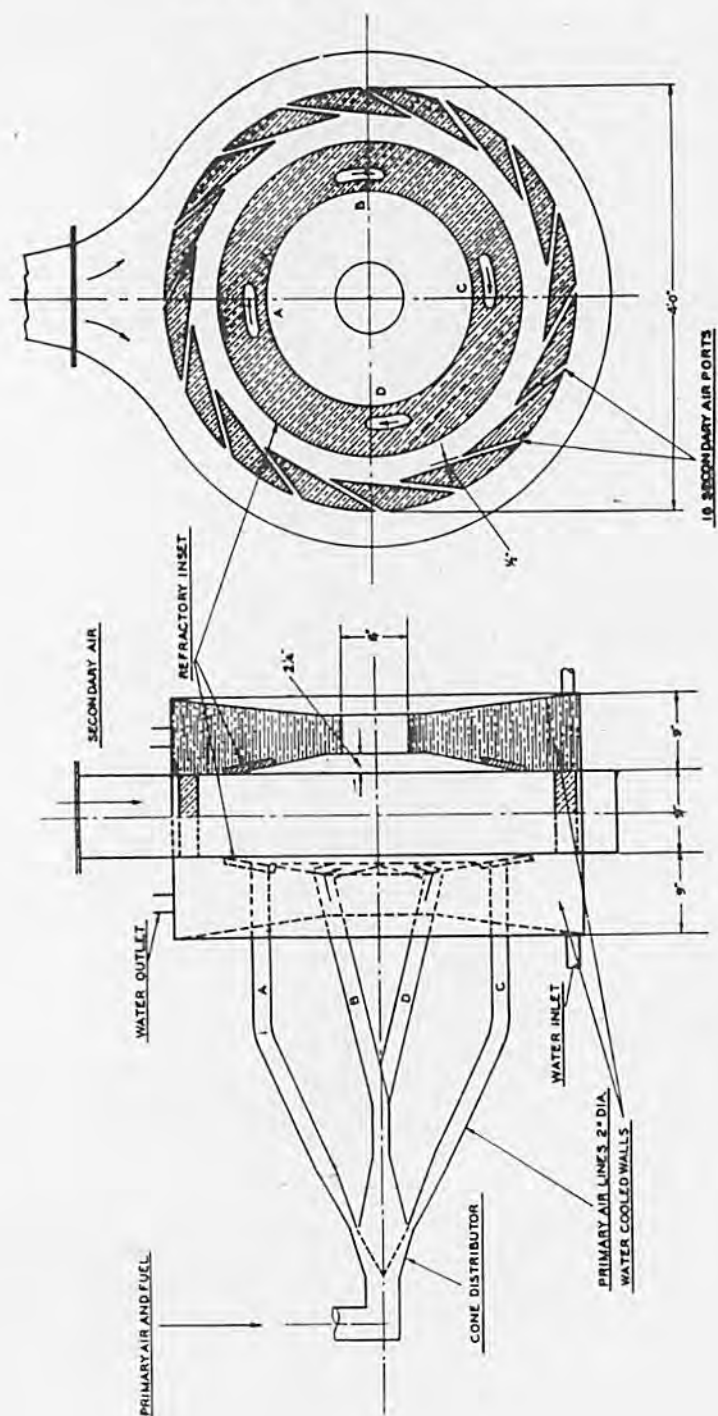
VORTEX COMBUSTION CHAMBER.
